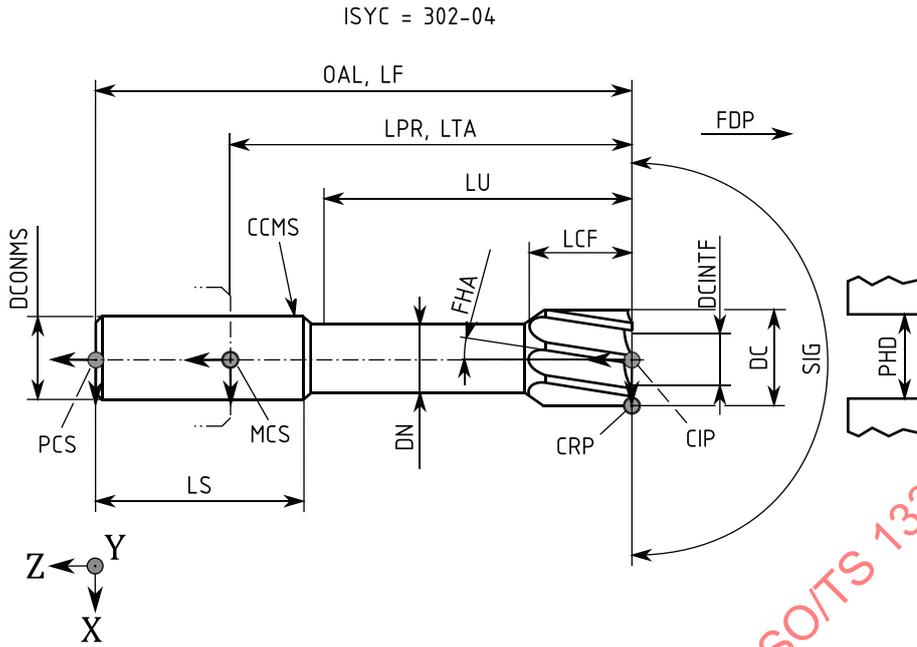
ISYC 302-04 - Counterbore, cylindrical shank, solid
